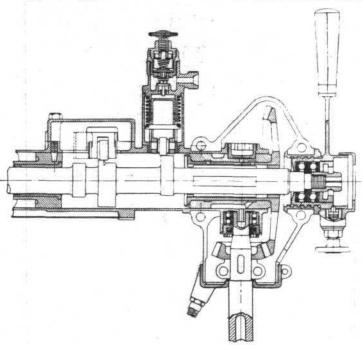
Arrangement of half compression [gear, camshaft drive, and details of air pump.
